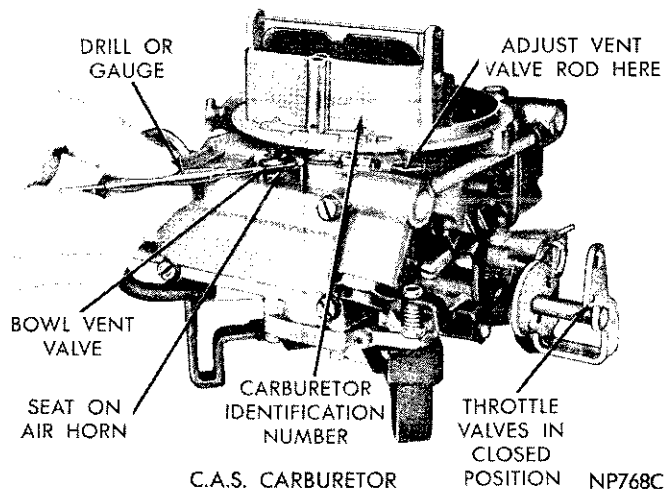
Checking Bowl Vent Valve Clearance (C.A.S. and E.C.S.)
